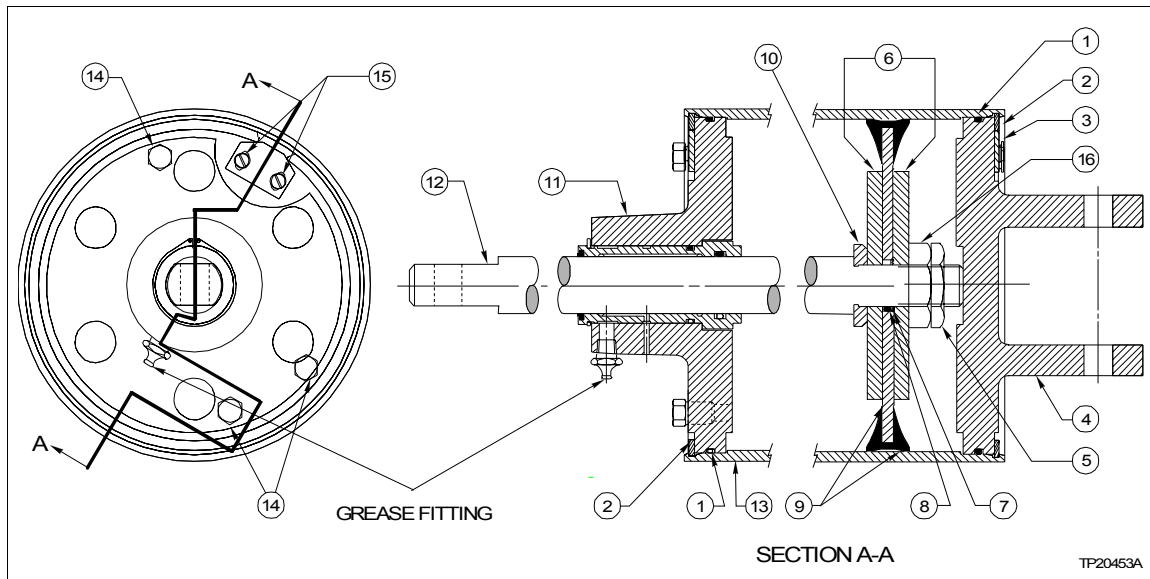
Cylinder Assembly for Type UP5 Actuators (Part Number 5328952°1)
